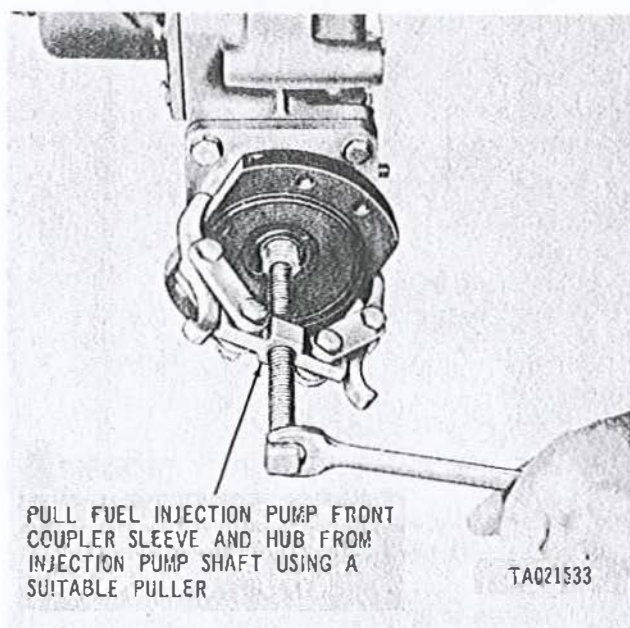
Removing fuel injection pump coupling sleeve and hub.
